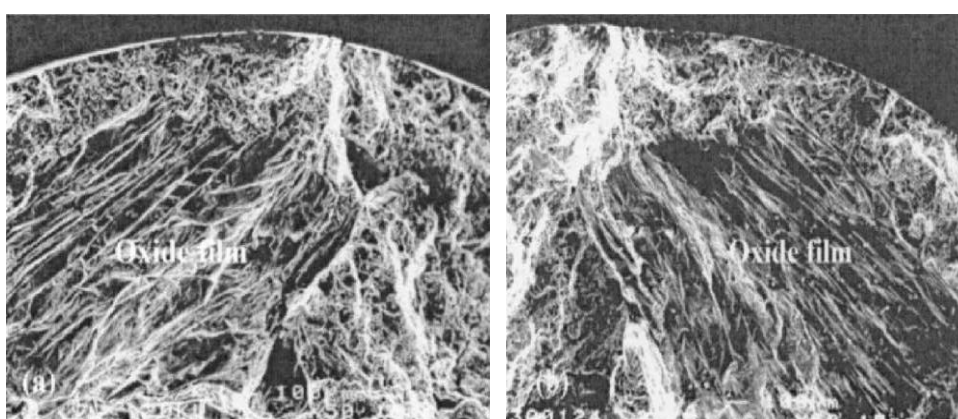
, symmetrical oxide films on the fracture surface of Al-alloy castings.
